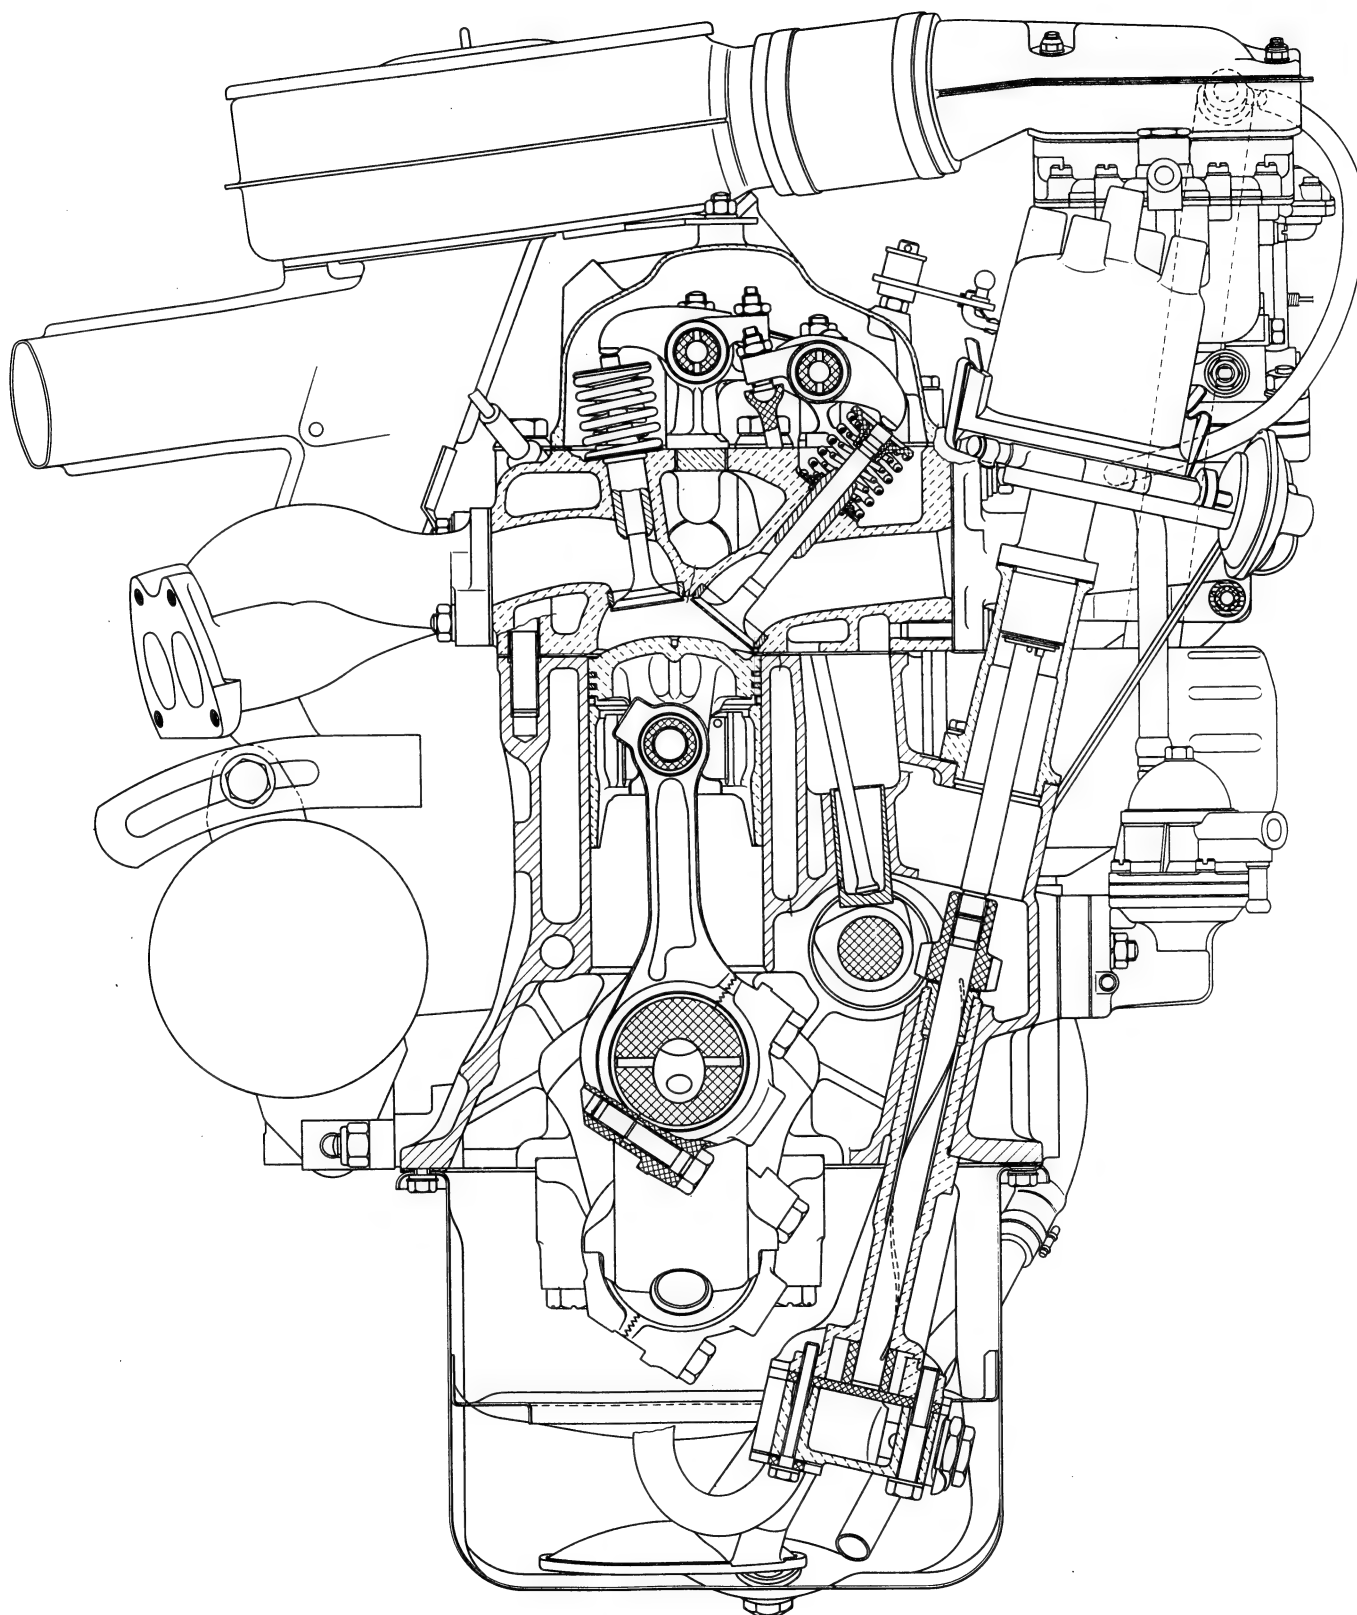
End sectional view of engine 115 C.005 across connecting rod, piston, valves, and oil pump and distributor drive mechanism.
